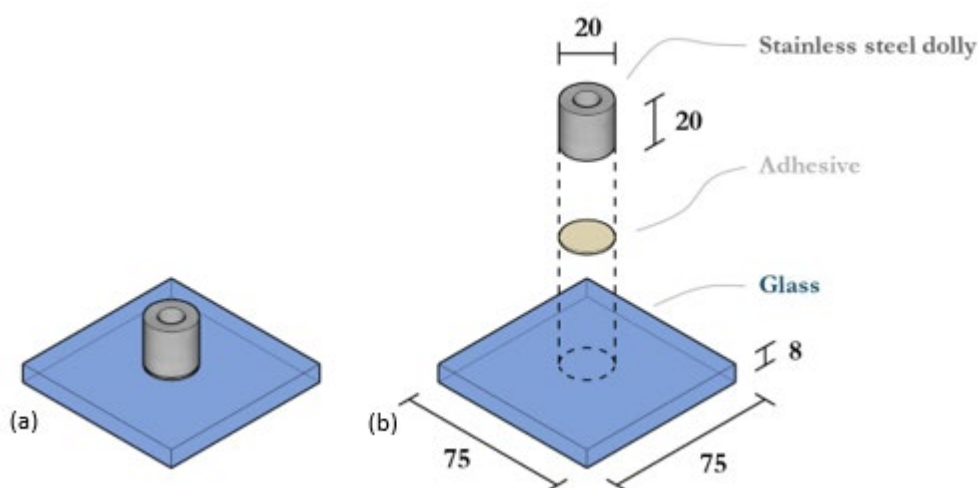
Schematic of the pull-off test configuration. (a) assembled glass-steel pull-off specimen. (b) exploded view showing the individual components, consisting of the glass substrate, epoxy adhesive layer and stainless steel dolly (dimensions in mm).
